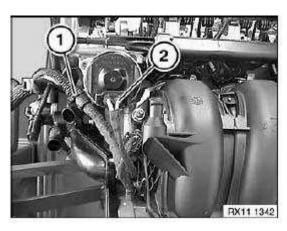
Identifying Plug Connection And Retaining Clip Courtesy of BMW OF NORTH AMERICA, INC.
